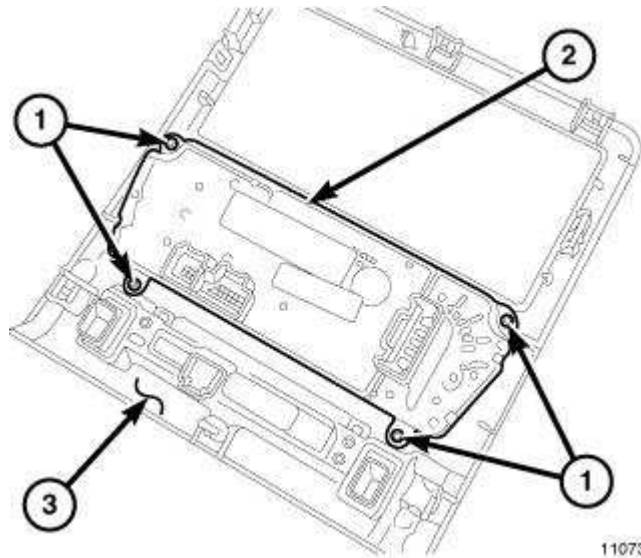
Removing/Installing A/C-Heater Control At Rear Side Panel Center Bezel
